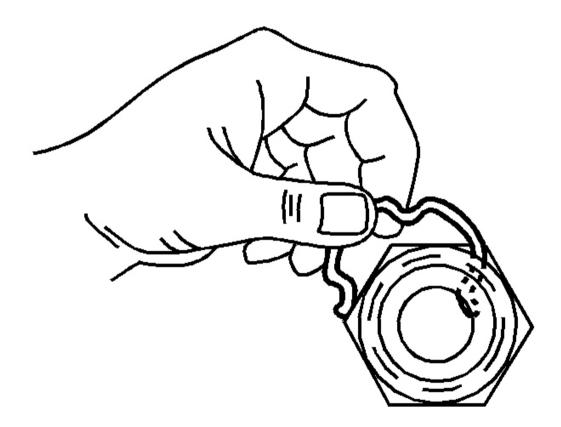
Hooking Retaining Ring Courtesy of GENERAL MOTORS CORP.
